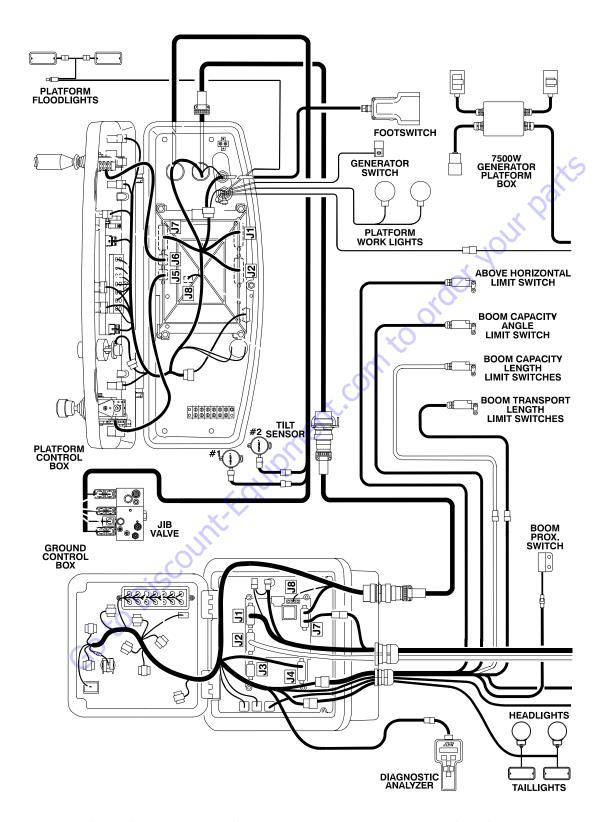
Electrical Components Installation (WITHOUT UGM) (SN 0300085332 through 0300140000) - Sheet 1 of 2
